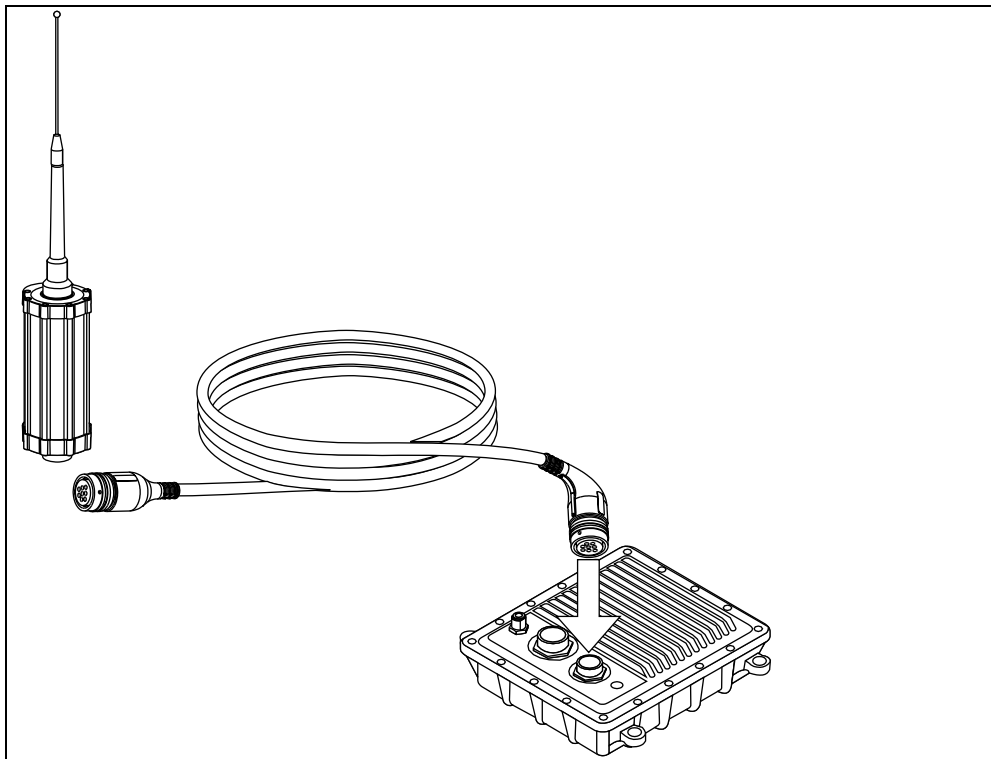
Power and I/O Cable (P/N 32942-17)
